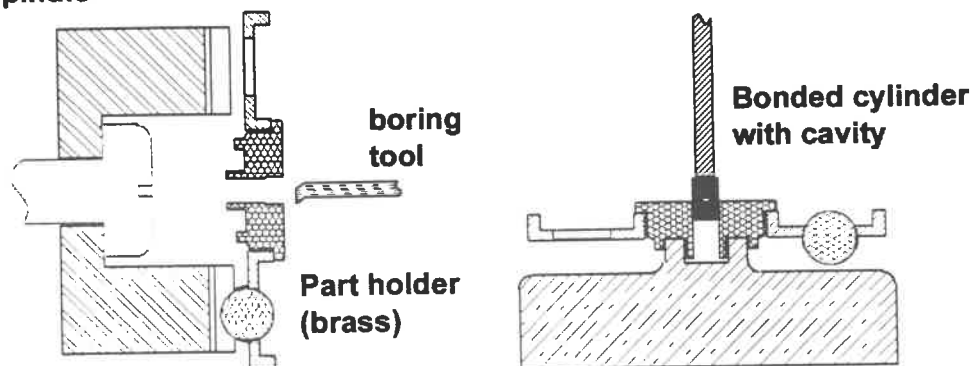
The quick flip fixture accepts the bonded spherical cavity. The left sectional view shows the brass part holder. The right shows the bonded cylinder being pressed in to the brass part holder.
